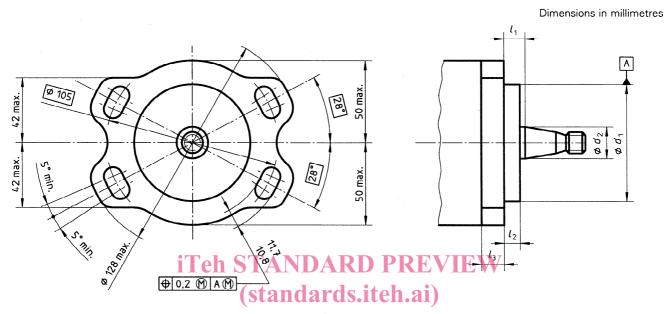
Rotary and distributor fuel injection pumps — Type 2 end-mounting flange <u>ISO 7299:1996</u>
